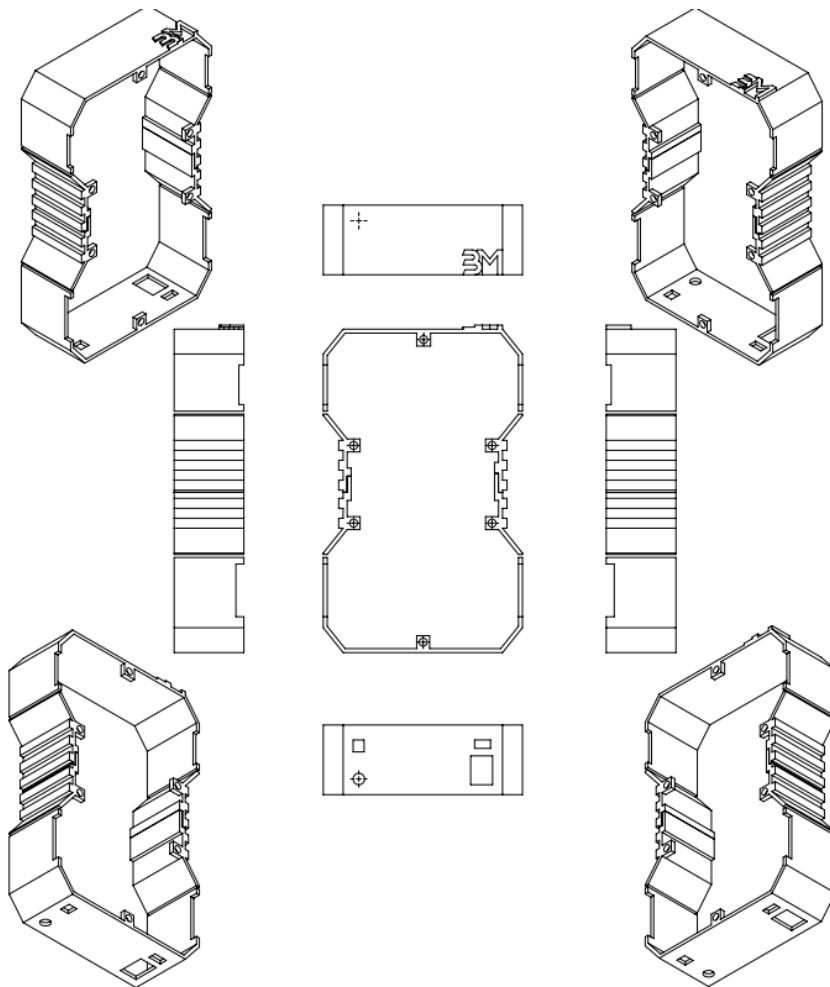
Descriptive Drawing of the Robot Mobile Chassis
